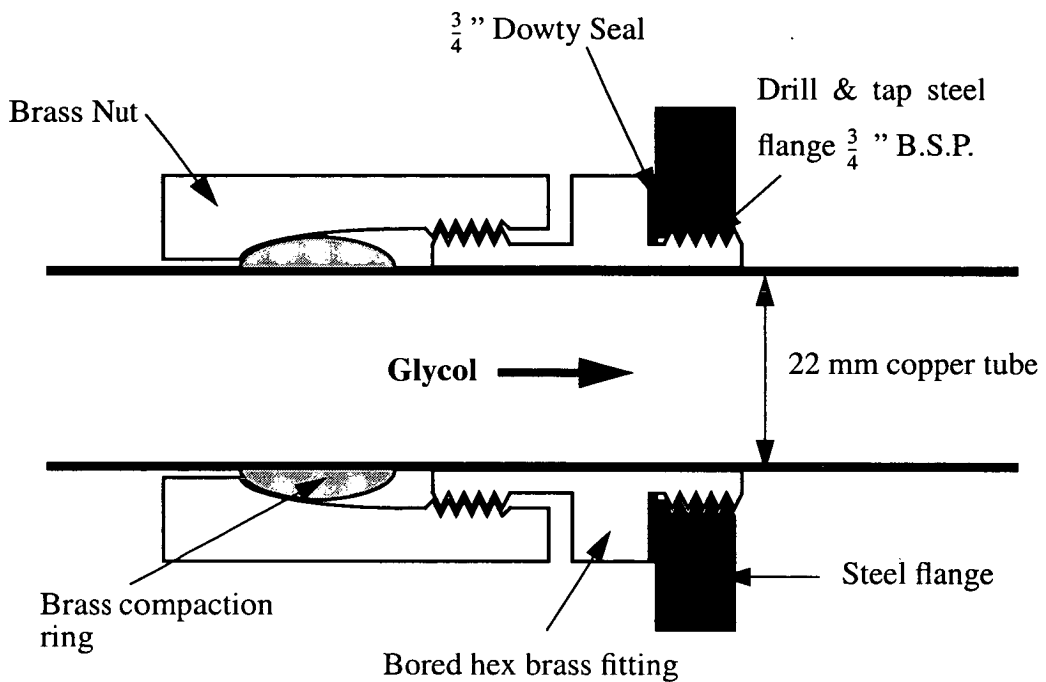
Brass fittings between evaporator flange and glycol tubes.
